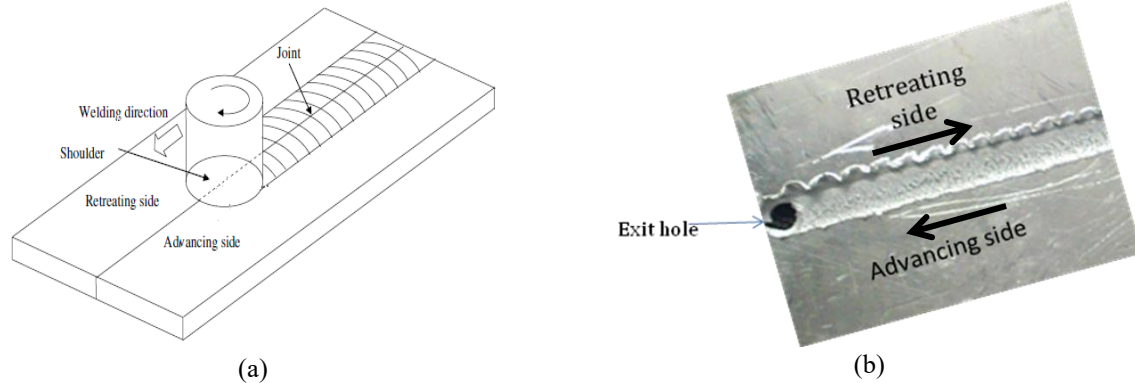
(a) Schematic illustration of the Friction Stir Welding process [1] (b) An FSW weld between Aluminum Sheets
